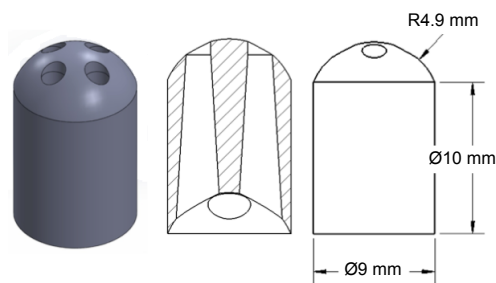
Vertebrae bead design and cross sectional view with dimensions.
